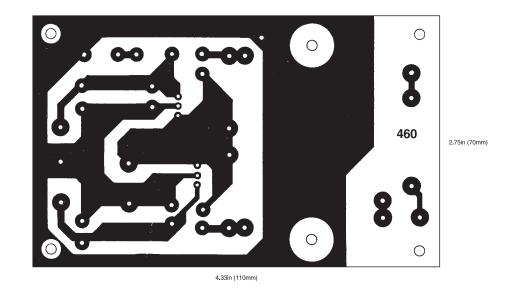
Mains Power Supply printed circuit boad component layout, full-size copper foil master and off-board wiring details to the other p.c.b.s. Switch S1 can be a standard mains toggle type.
